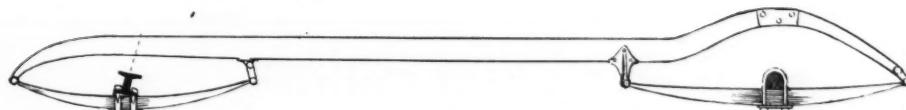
Side view of frame to be used with Dodge Brothers car converted into racing car
